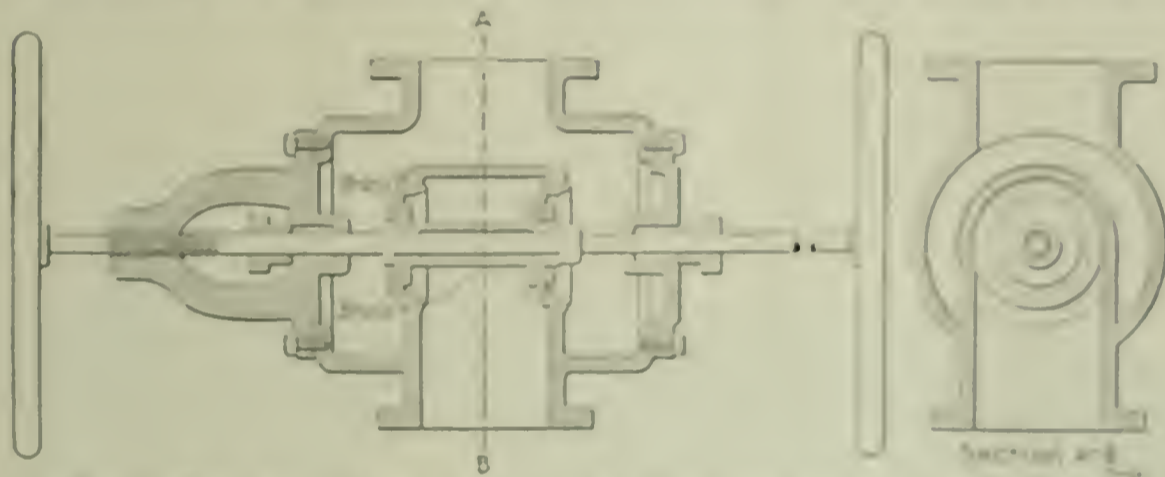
SECTIONAL VIEWS OF DOUBLE-WHEEL-AND-STEM THROTTLE VALVE.
